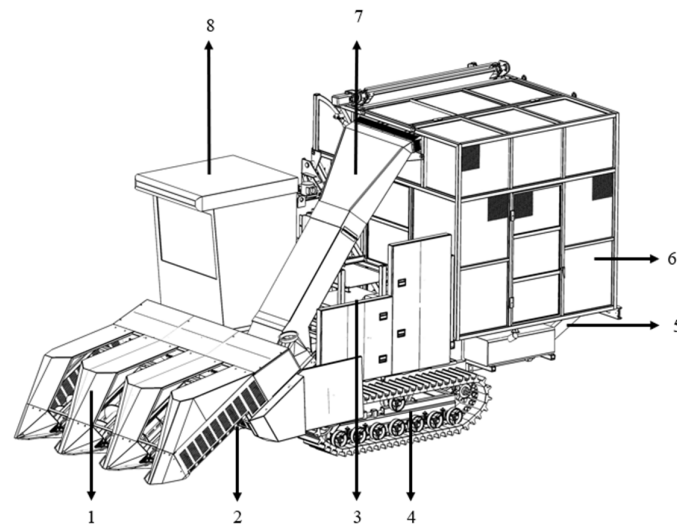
Brush-roller-crawler cotton harvester: (1) cutterhead assembly; (2) cotton boll collecting device; (3) blower; (4) propulsion chassis; (5) cotton bin base; (6) cotton bin; (7) air conveyance channel; (8) operator's platform.
